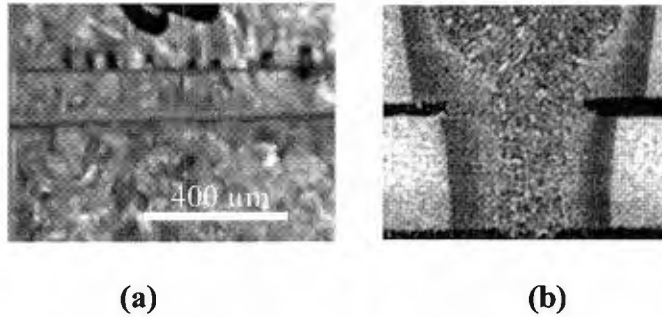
Optical micrographs of laser welded galvanized steel: (a) longitudinal section of weld, (b) transverse section of weld in lap-joints using “joint gap” approach.
